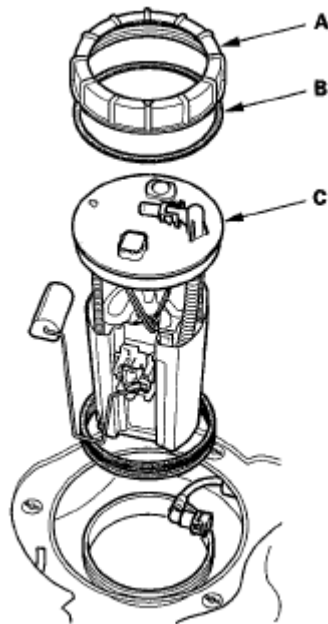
Identifying Locknut, Locknut Plate, And Fuel Tank Unit
